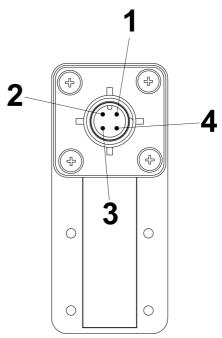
Pin-assignment, socket M12x1 Form 30x70)
